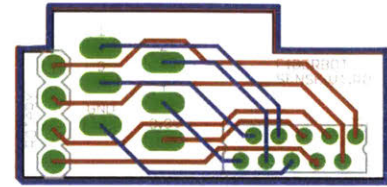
PCB 'Sense'. Image: Levi Cai, Mediated Matter.
